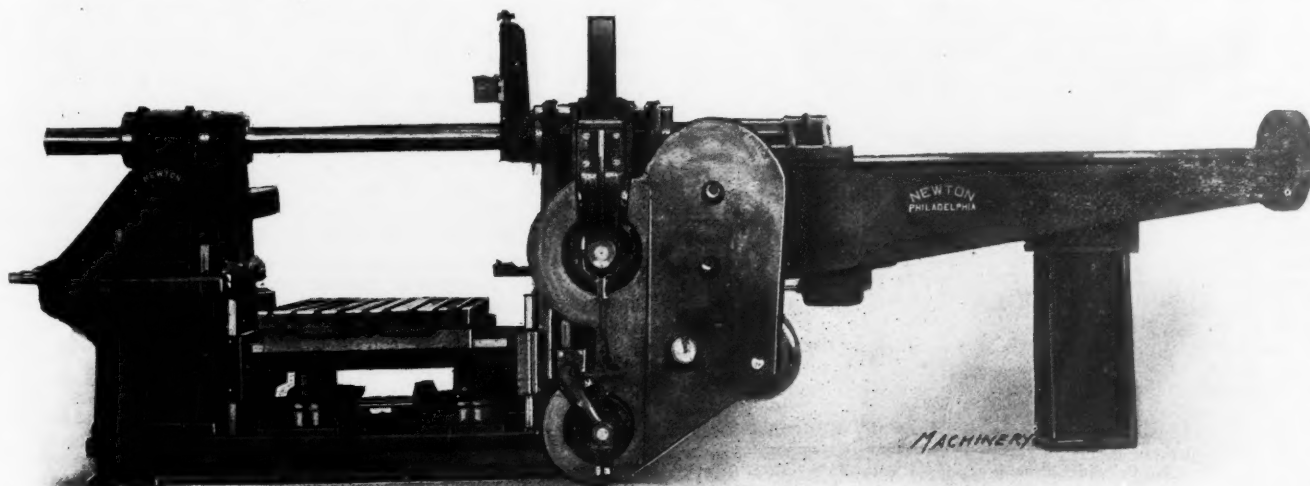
Opposite Side of Boring Machine shown in Fig. 1
